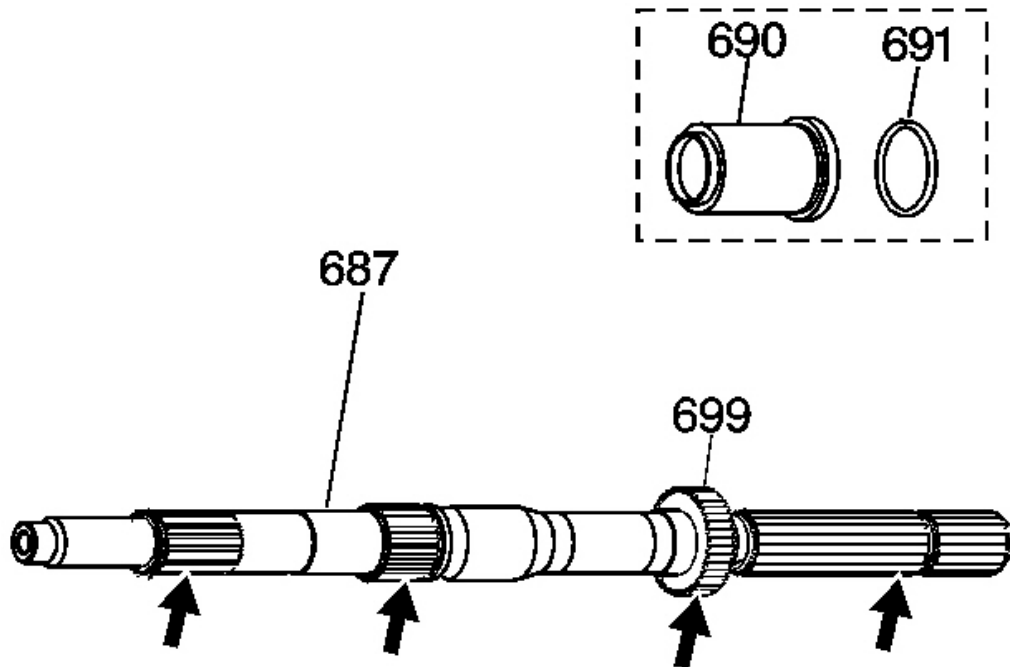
Identifying Output Shaft Seal & Output Shaft Sleeve
